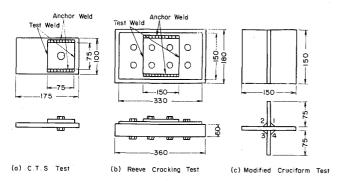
Fillet Weld Cracking Test Assembly.
